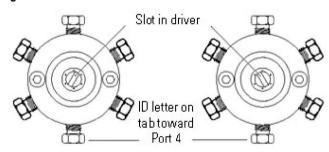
C6 W valve with preload and rotor removed (preload end view)
